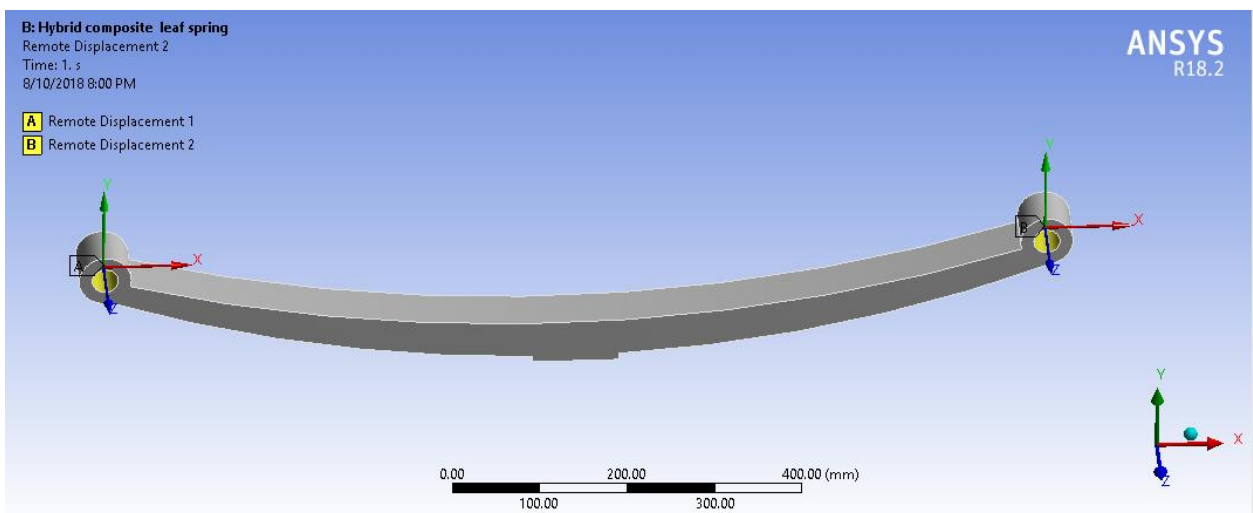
Boundary condition of the hybrid composite leaf spring
